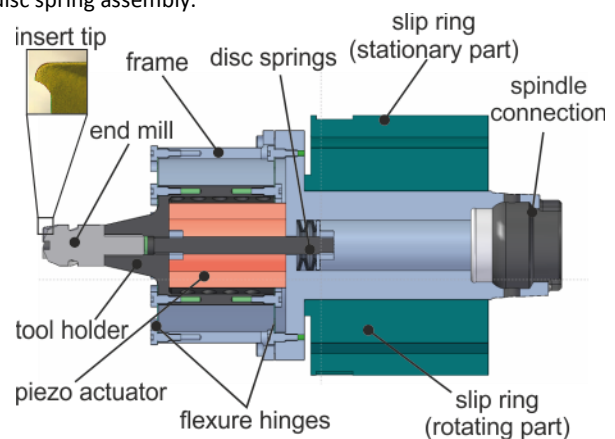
Sectional view of the piezo-actuated tool. Sb/78684 ©IFW
